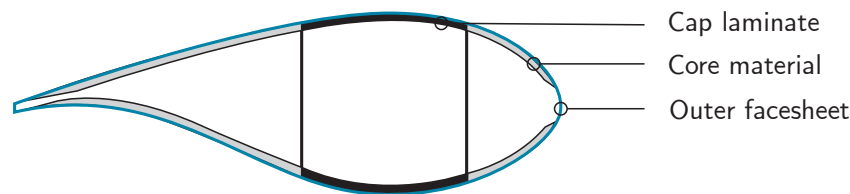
Illustration of the main material components in wind turbine blades, highlighting the presence of a cap laminate, core material, and laminate facesheet.
